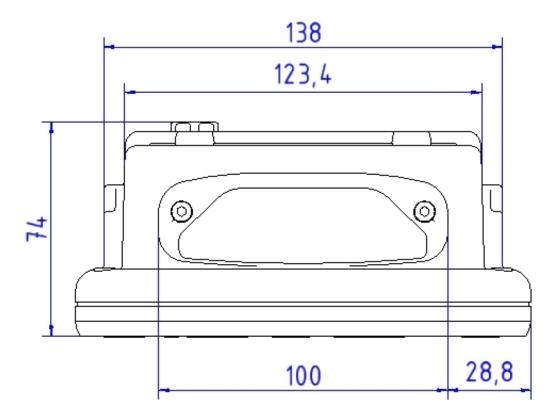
Dimensions DLoG XMT 5/7 top view
